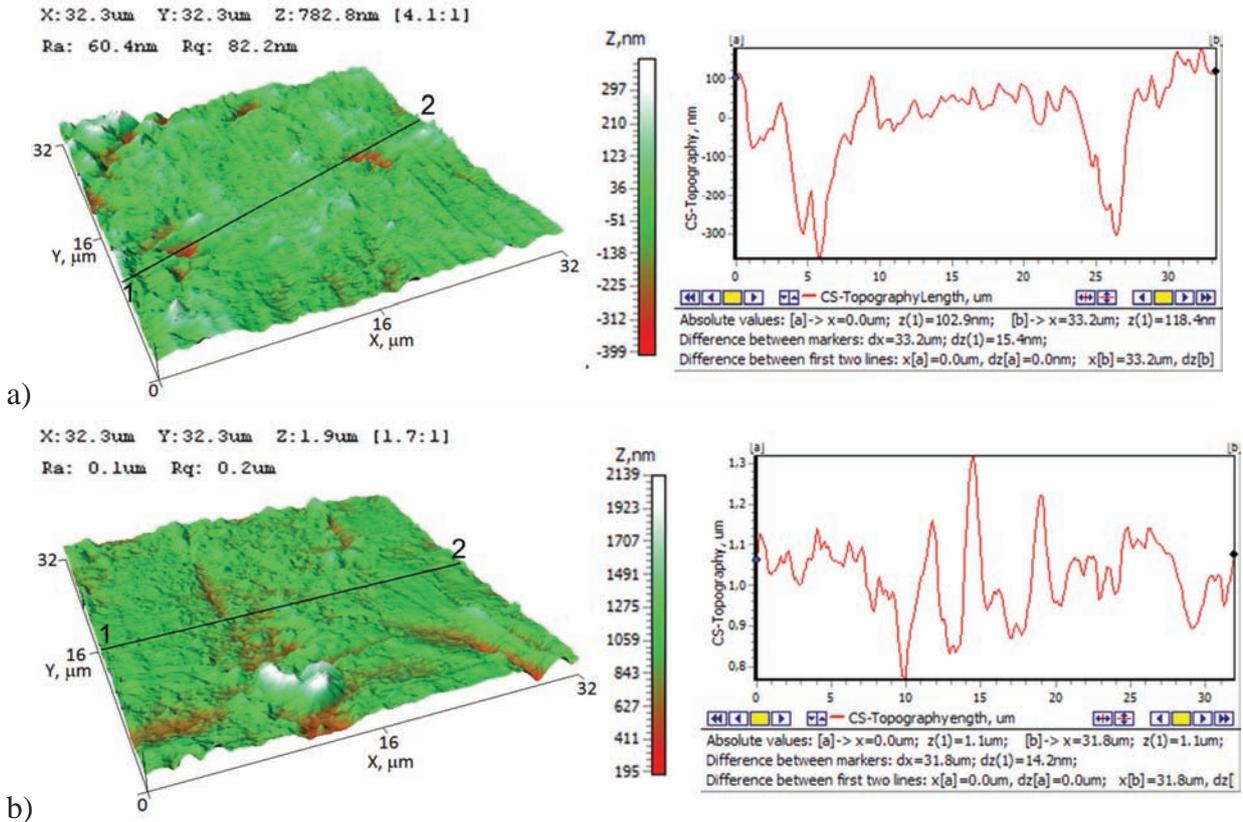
Surface topography of thick-walled, smooth bronze bearing sleeve. 3D view and cross-section, for: a) non-used bearing sleeve b) used bearing sleeve
